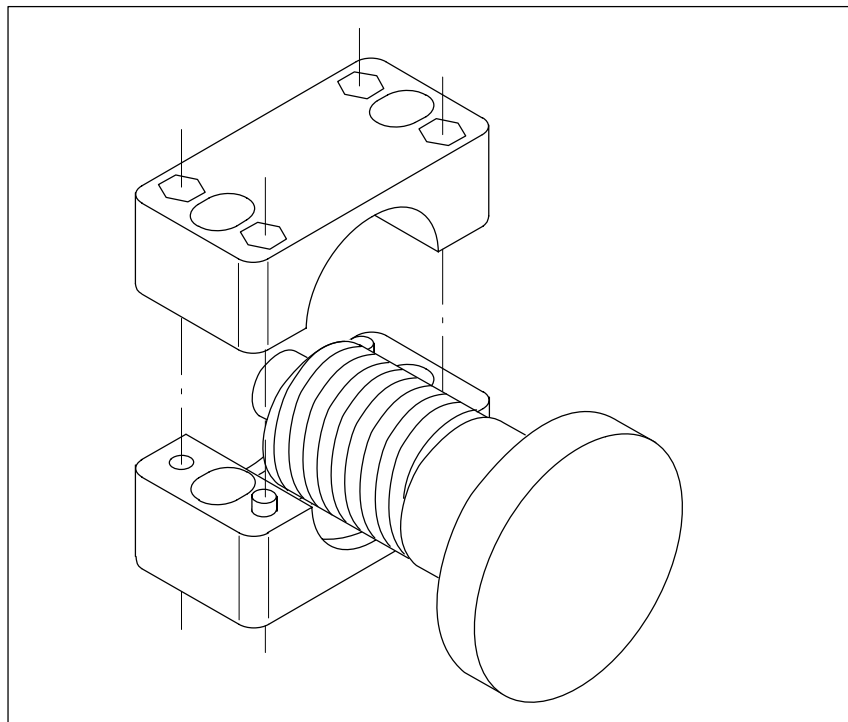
Drawing of mounting of SLA 81 with mounting clamp
